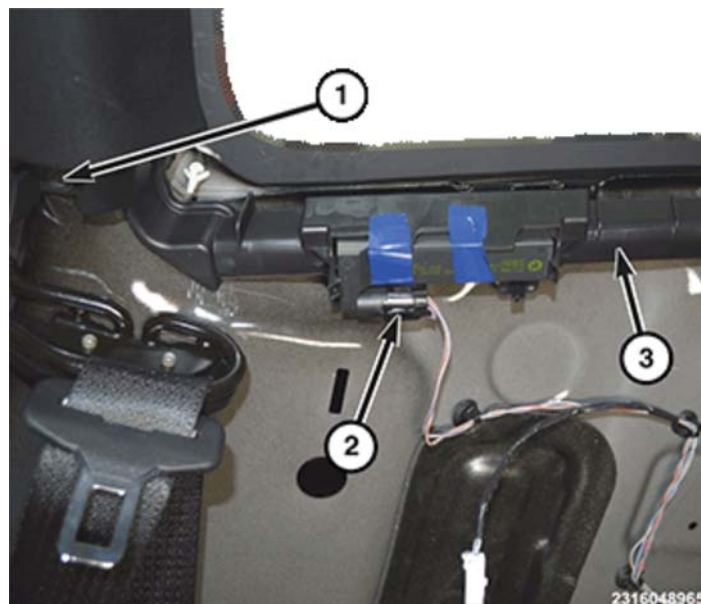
Screw, Wire Harness Connector & Quarter Trim Upper Panel
